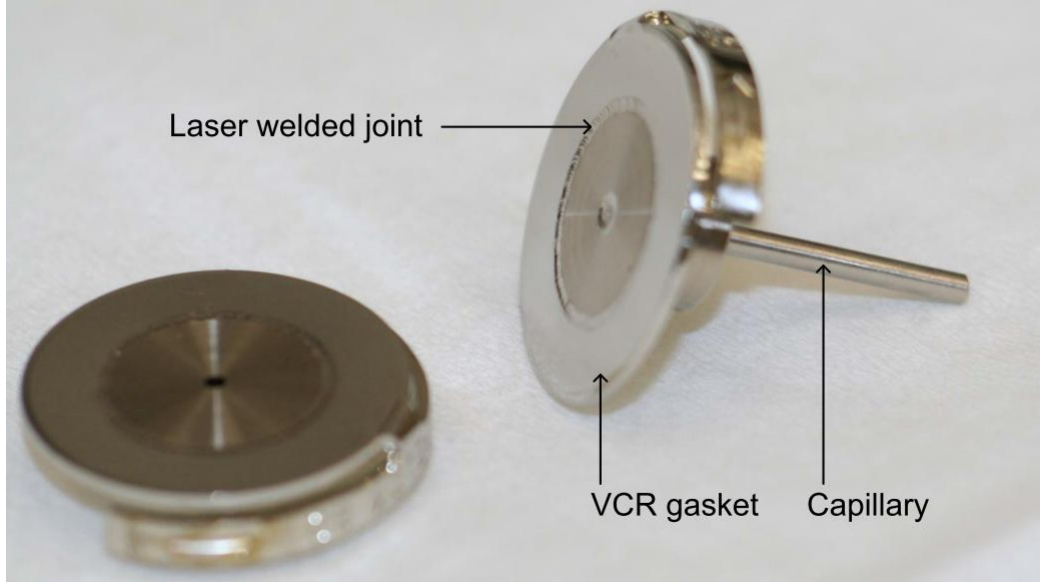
Photo of the differential pumping section. The capillary is welded into a VCR gasket.
